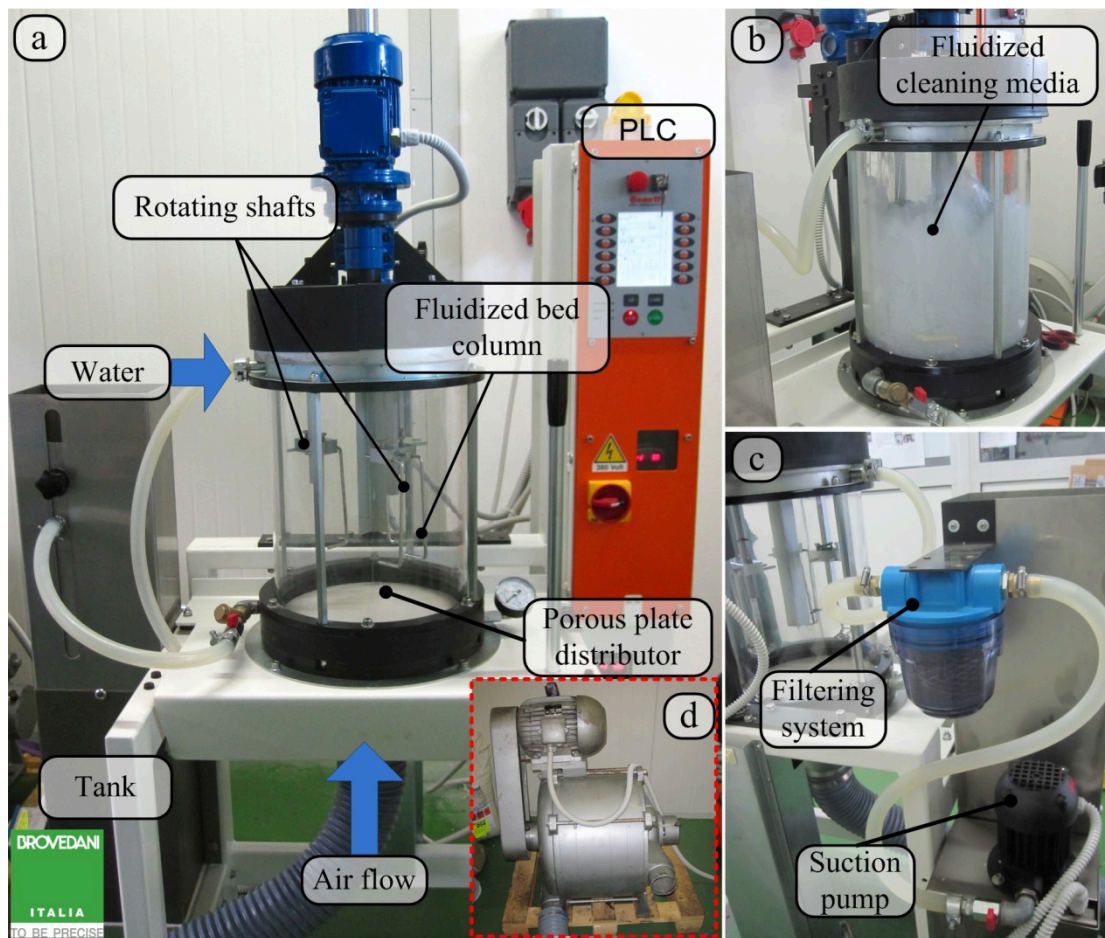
Prototype Fluidized Bed Machining for washing mechanical components: (a) overview of the apparatus, (b) fluidized cleaning media within the bed column, (c) back side of the washing machine with suction pump and filtering system of liquid bath, (d) air blower for supplying gas flow (courtesy of University of Tor Vergata and of Brovedani SpA)
